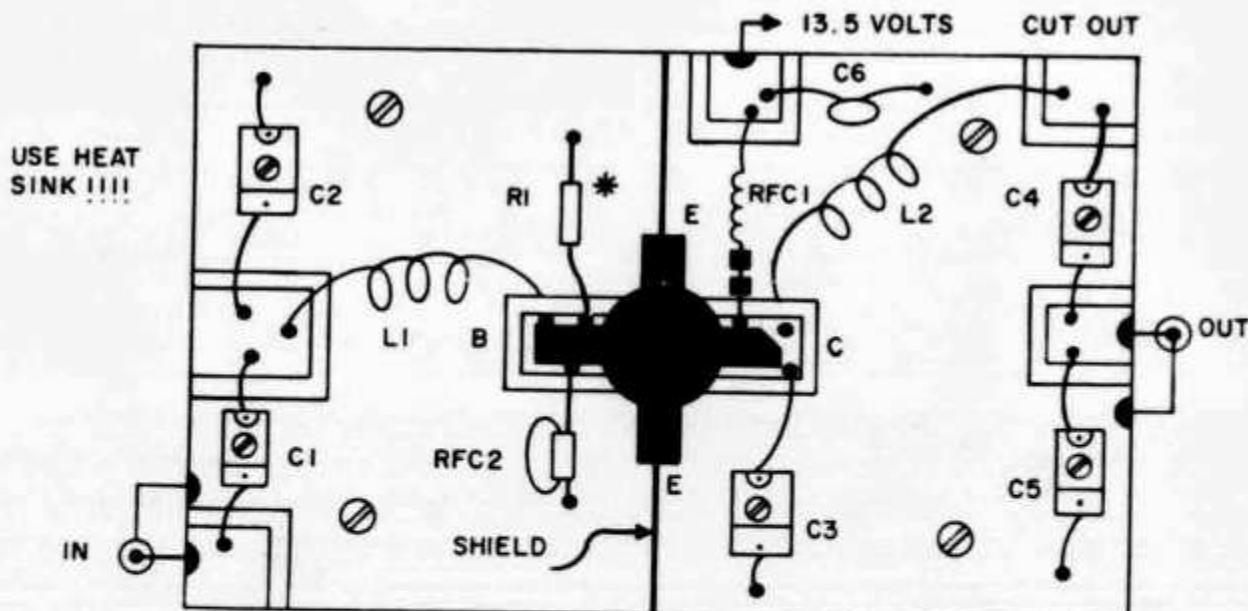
Full size circuit board showing parts placement. Components mounted on copper side.
